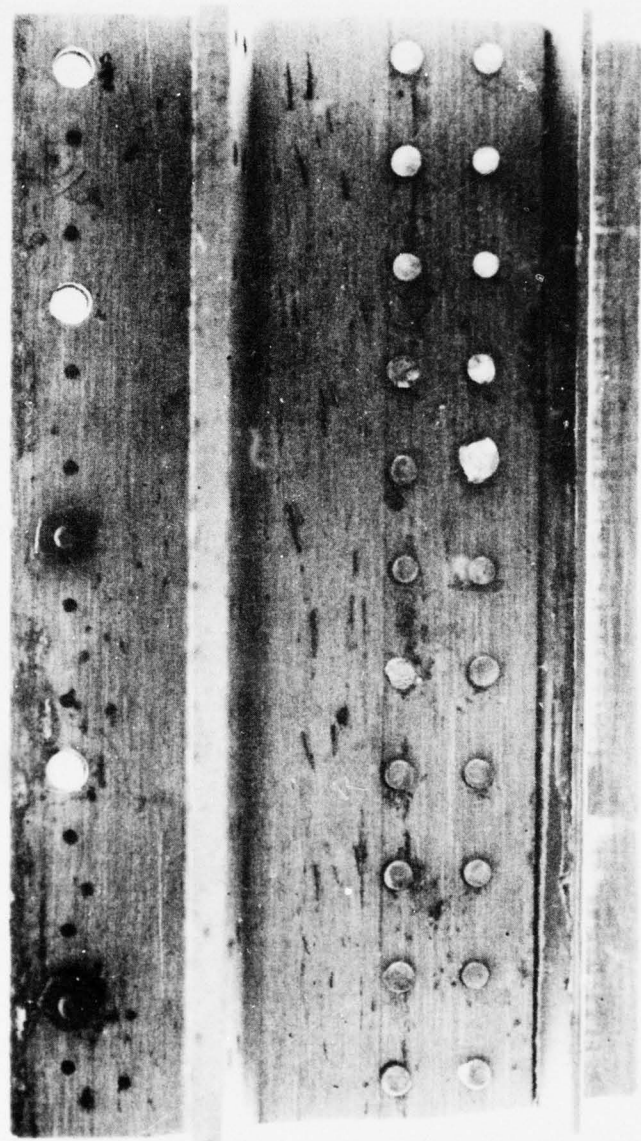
RIVETED ALUMINIUM-ALLOY COMPONENT USED AS TEST SPECIMEN.
